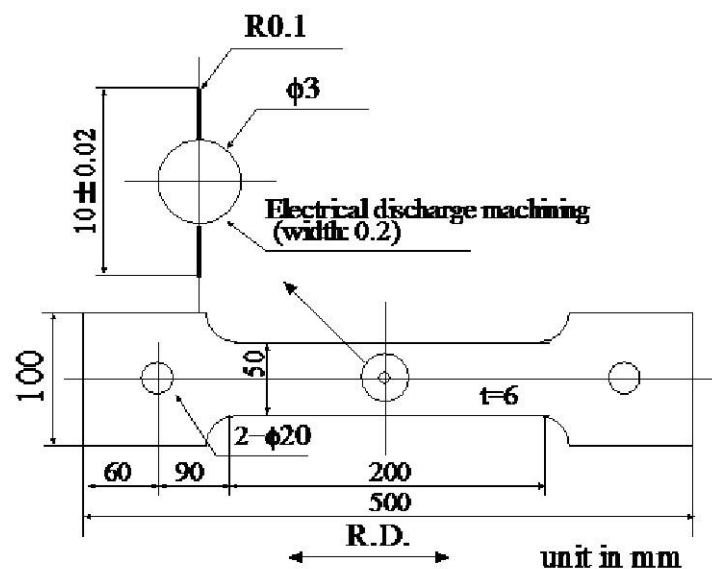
Centre cracked tensile (CCT) specimen used in the fatigue crack propagation tests.
